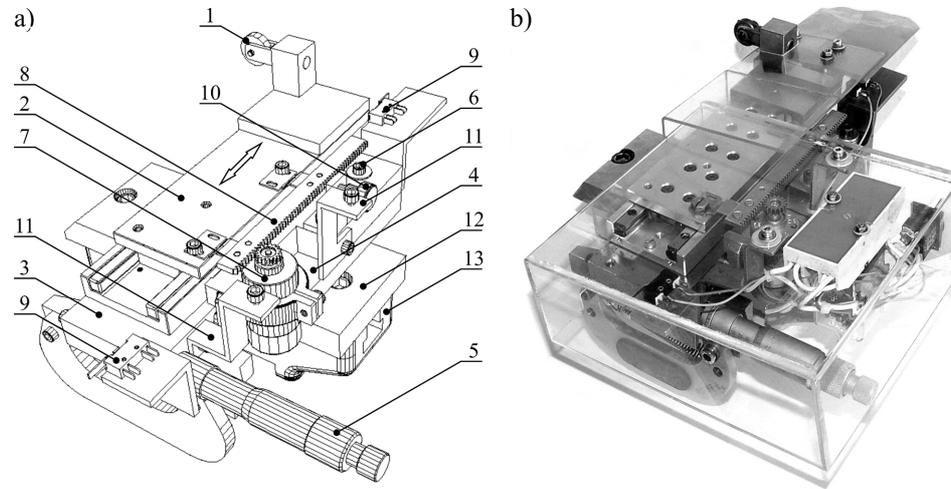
Functional elements (a) and view of the test-ready device to precision dressing (b): 1 – dresser, 2 – slide plate, 3 – upper basis turning about specified angle, 4 – immovable bottom base, 5 – micrometer screw, 6 – axis of rotation of upper base, 7 – driving motor, 8 – toothed rack, 9 – limit switch, 10 – blockade of table, 11 – bracket of casing, 12 – backing plate, 13 – dresser base
